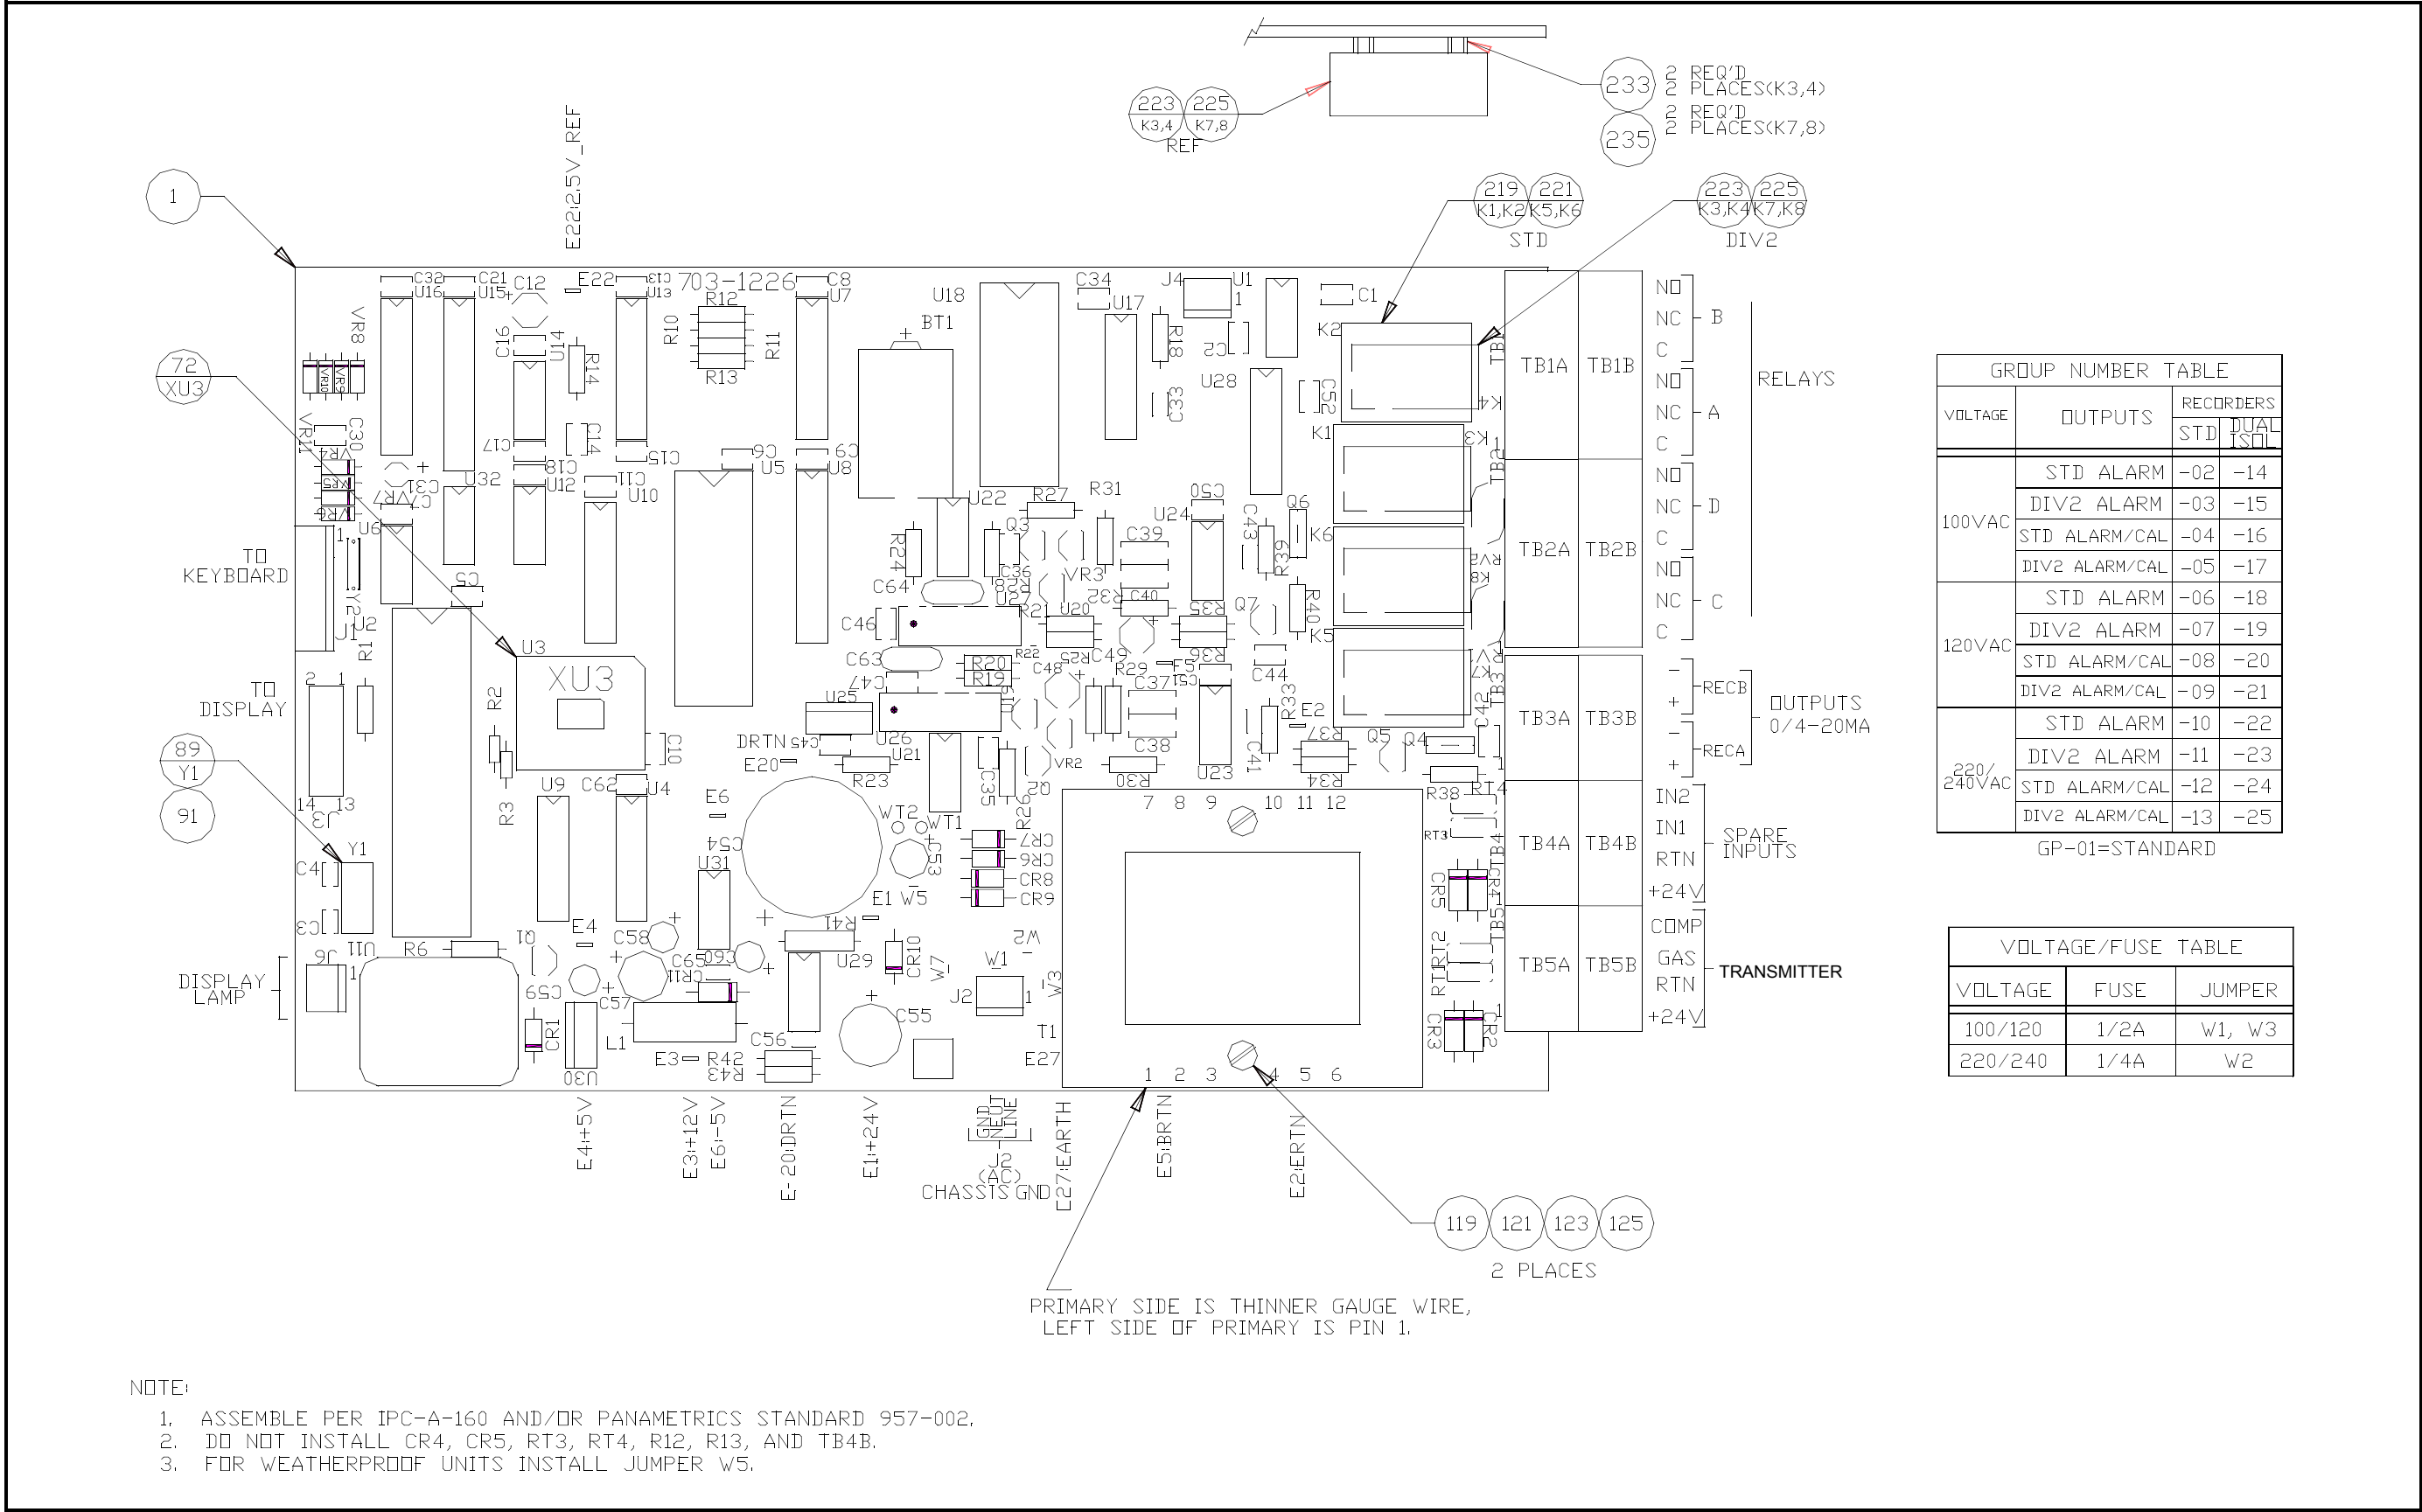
Oxygen Display Printed Circuit Board Assembly (Dwg. #703-1226)
